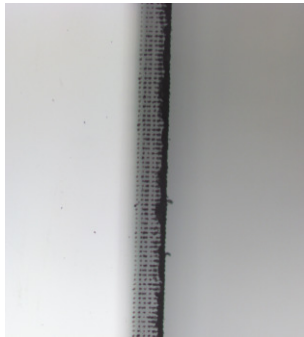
Damage at the rear side of the glass workpiece.
